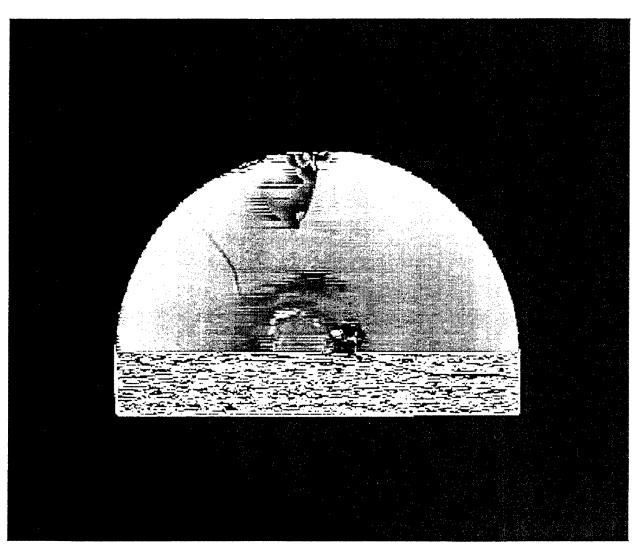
24.33 mm from bottom of disk with 65° rotation about X-axis.
